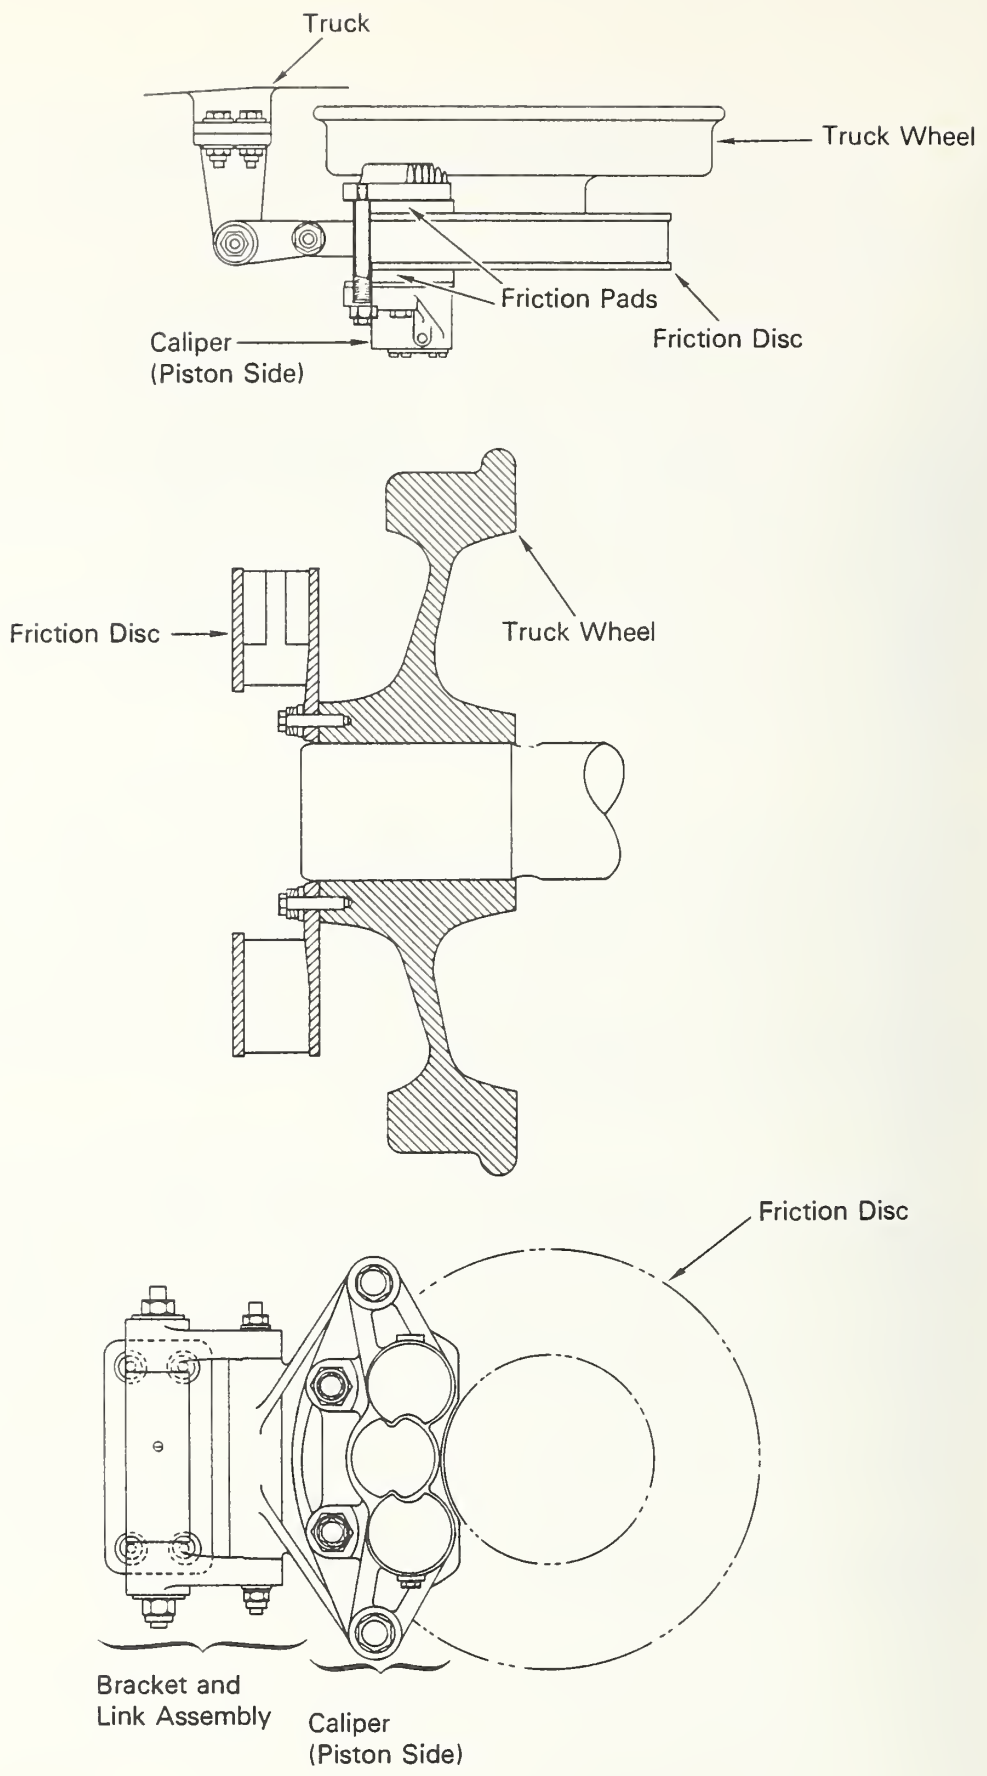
WMATA RAIL TRANSIT VEHICLE DISC BRAKE ASSEMBLY
